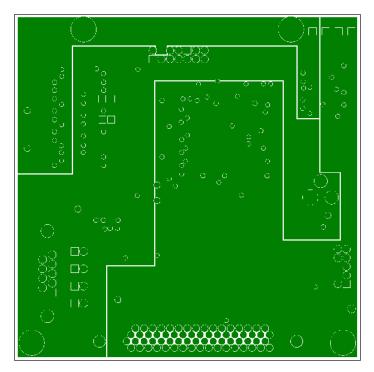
Debug Board: Middle Layer 2, Supply Plane
